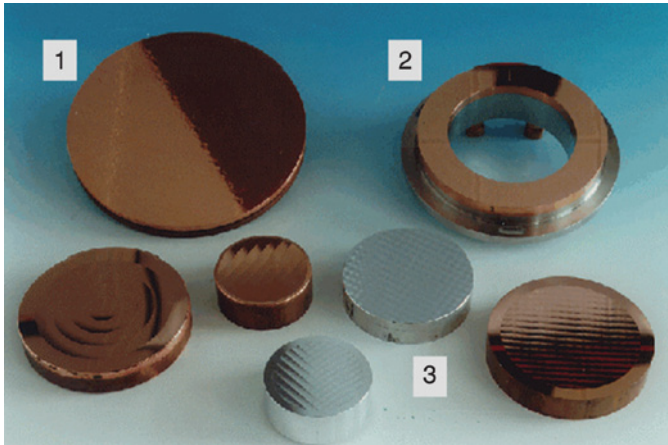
Diamond machined laser mirrors (FHG IPT)
